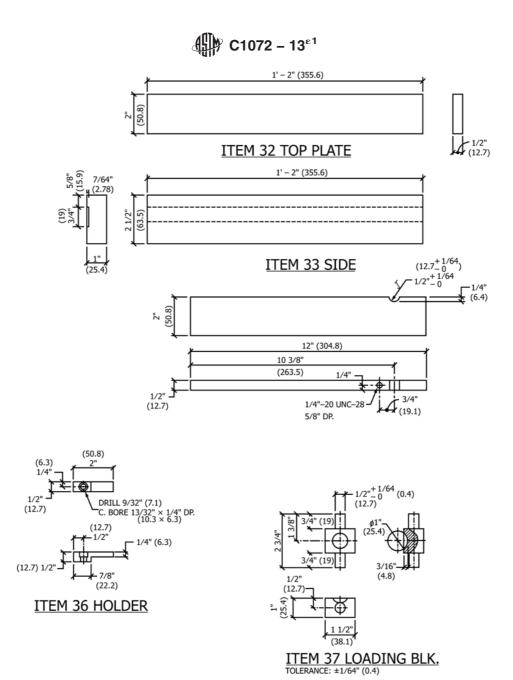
Detail Drawings of Bond Wrench (continued)
